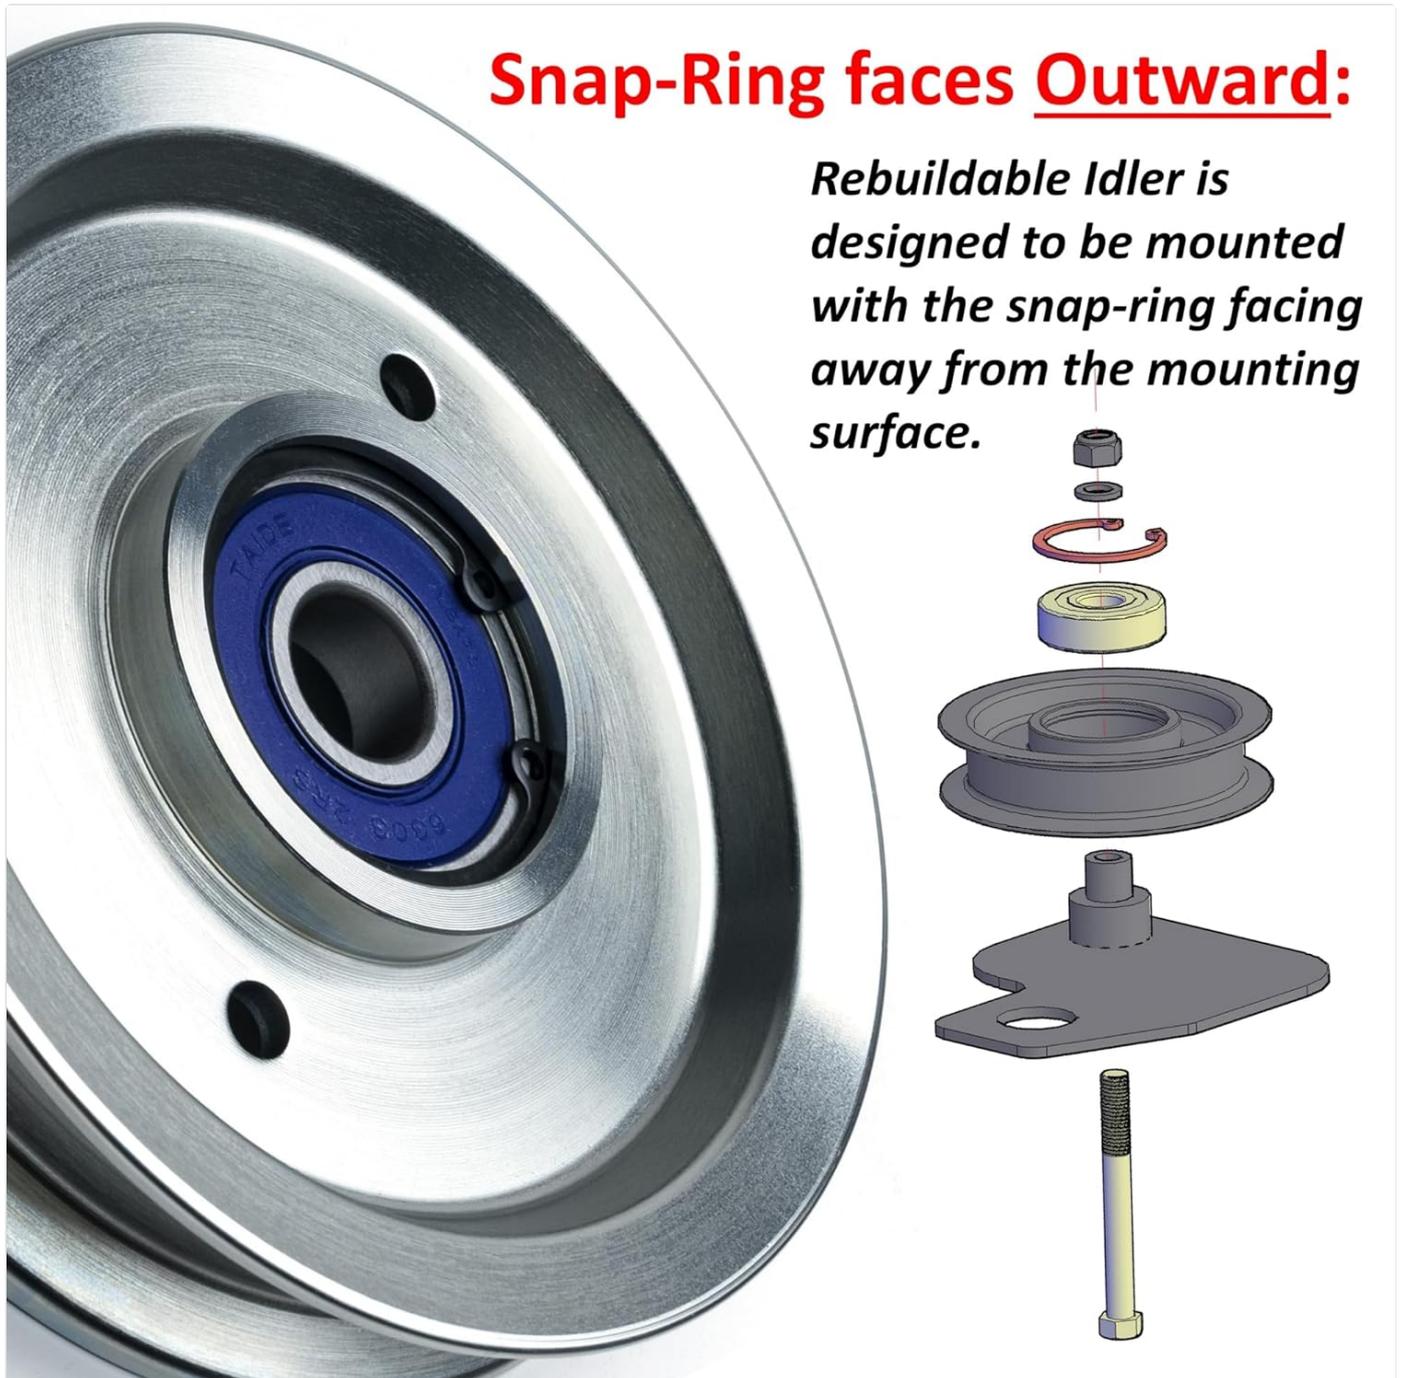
Diagram illustrating the correct orientation for mounting the rebuildable idler, with the snap-ring facing outward, away from the mounting surface. An exploded view of the assembly is also shown.
